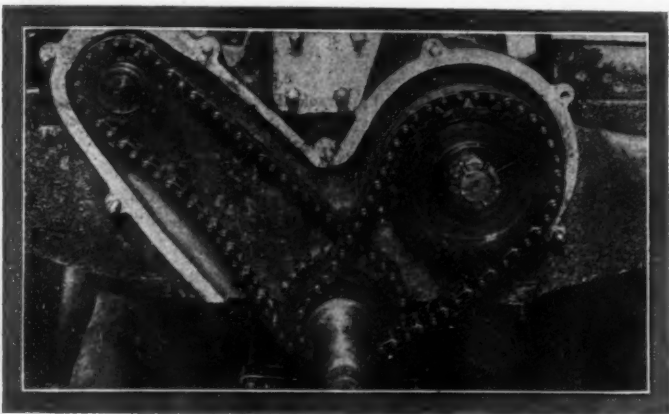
Silent-chain drive employed on the Stoddard-Dayton-Knight motor
